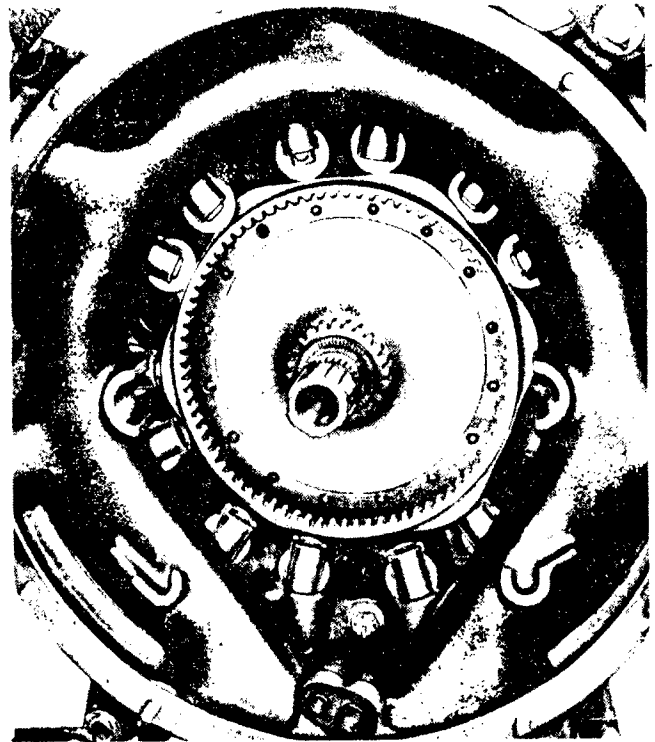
Rear Bearing Spacer and Cam Ring Installed on Tail Shaft
